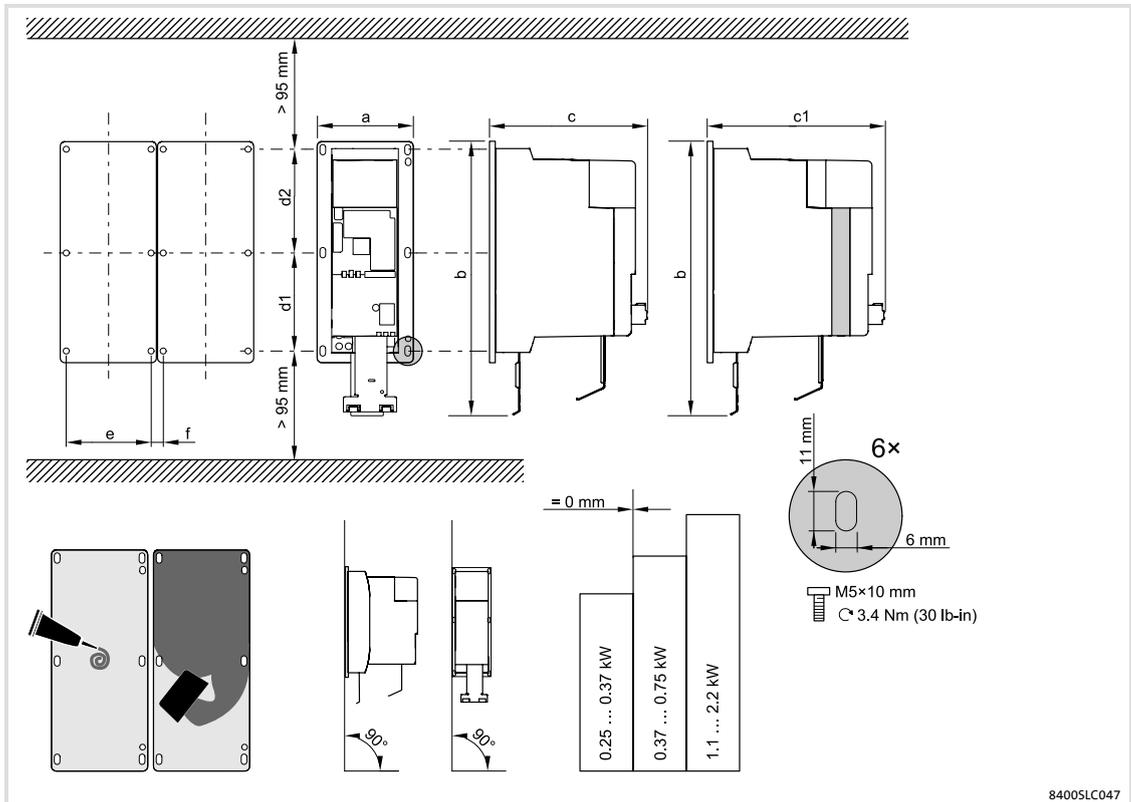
Dimensions: Mounting in "cold-plate" technique
